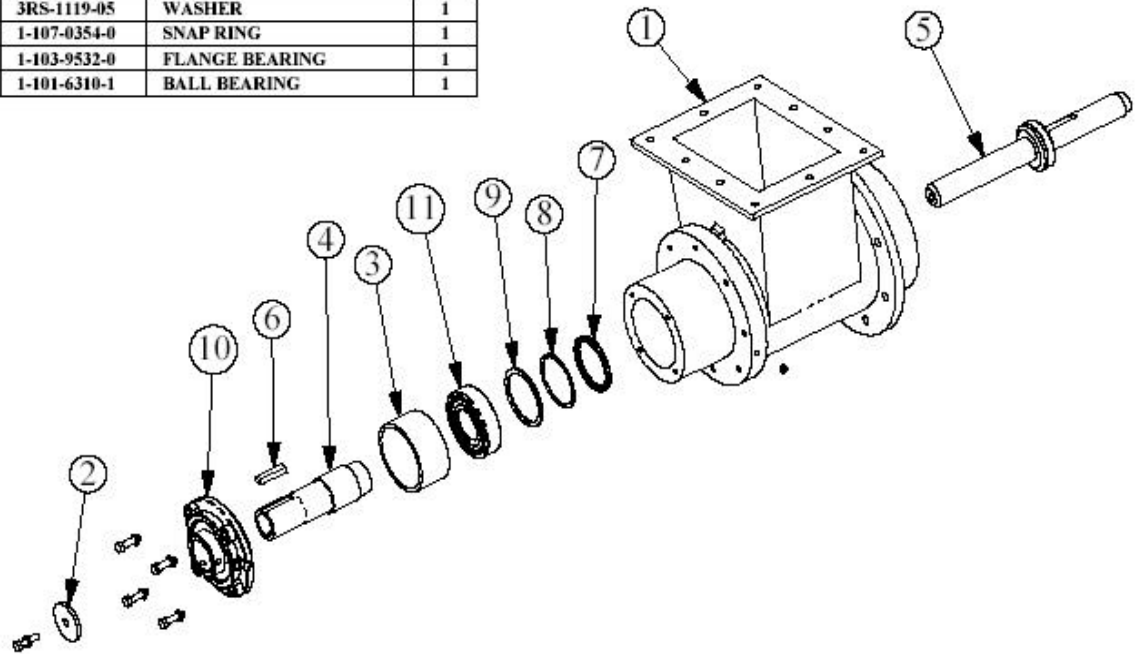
RS 700/1500 Bearing Assembly Exploded View
